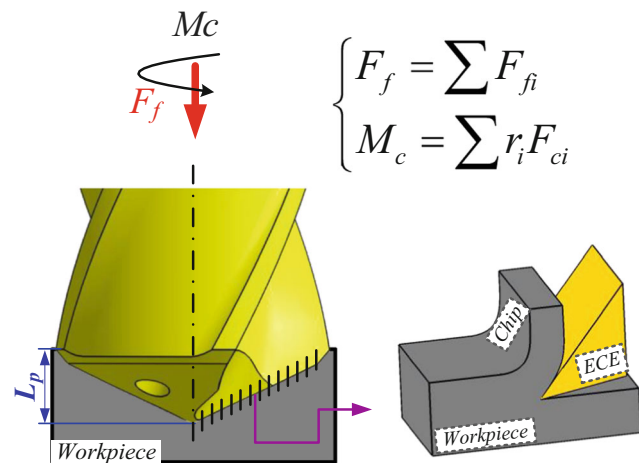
Decomposition of chisel edge and cutting edge into elementary cutting edges cutting conditions: drill_Z3, $V_c = 30$ m/min, $f_z = 0.035$ mm/rev/th
